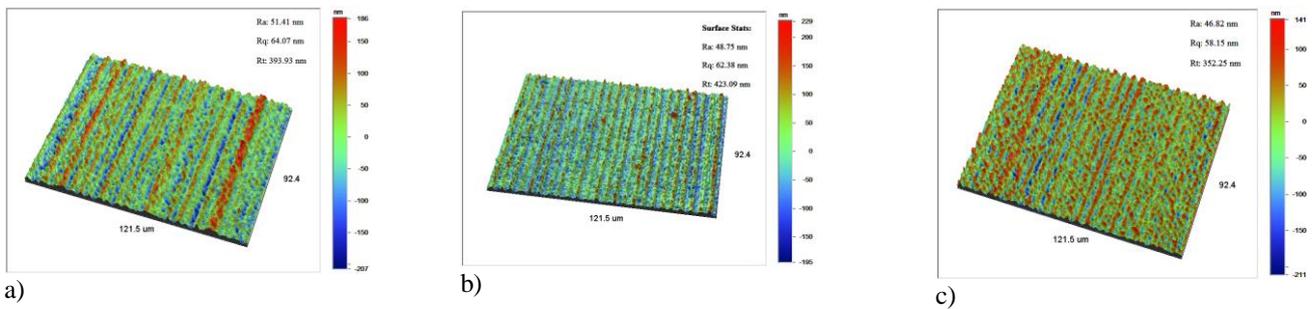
Three dimensional image of the surface finish of the machined samples with different concentrations of CNT+HDA. Cutting conditions and tool geometry were, respectively: f = 2.5 µm/rev, ap = 1 µm; Rp = 0.75 mm and γ = 0°. a) RTM6 +0.02%wt CNT + 0.02%wt HDA; b) RTM6 +0.1%wt CNT + 0.1%wt HDA; c) RTM6 +0.7%wt CNT + 0.7%wt HDA.
